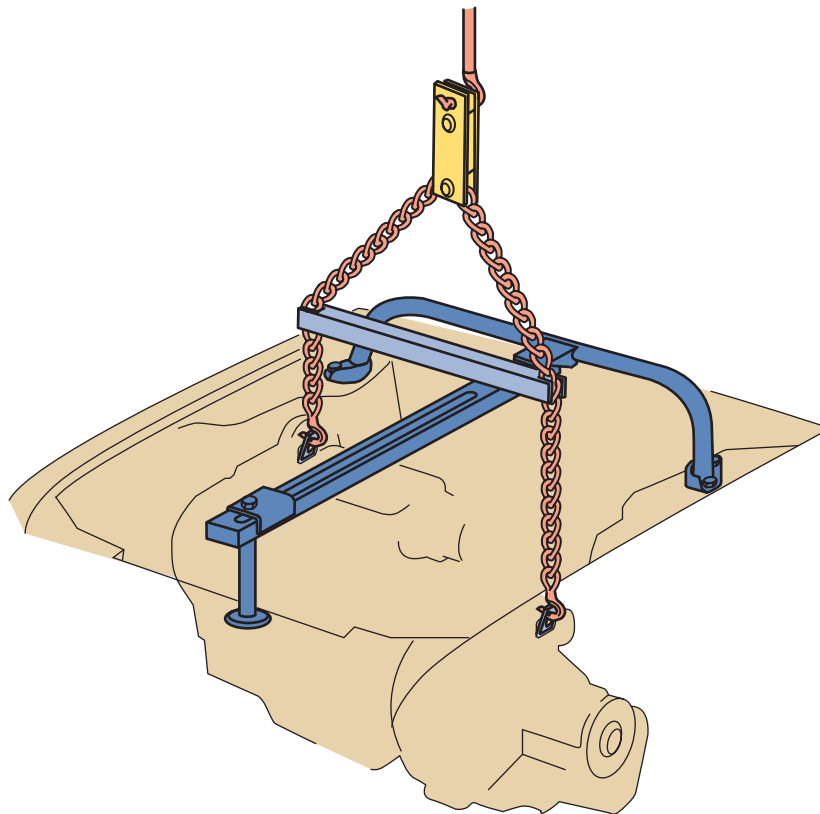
Equipment needed to install an engine from the top of a FWD vehicle.
